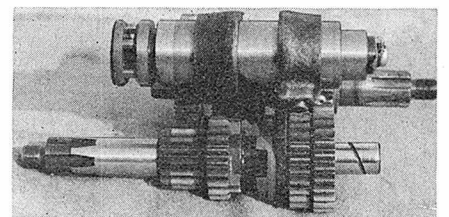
View of F3 transmission and shifter assembly ready for installation in case.
